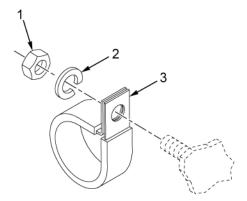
Location U, Elbow from Weldment Removal.
